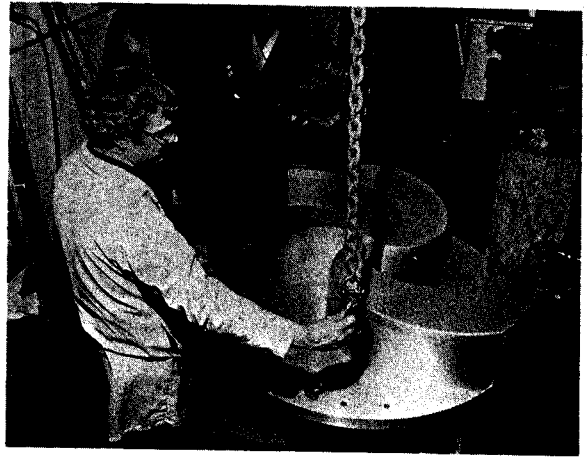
The set of aluminum pole tips which will be used as a "hammer form" in fabricating the copper liner structure. This liner will completely cover the poles and isolate the trimming coils in a separate vacuum envelope.
